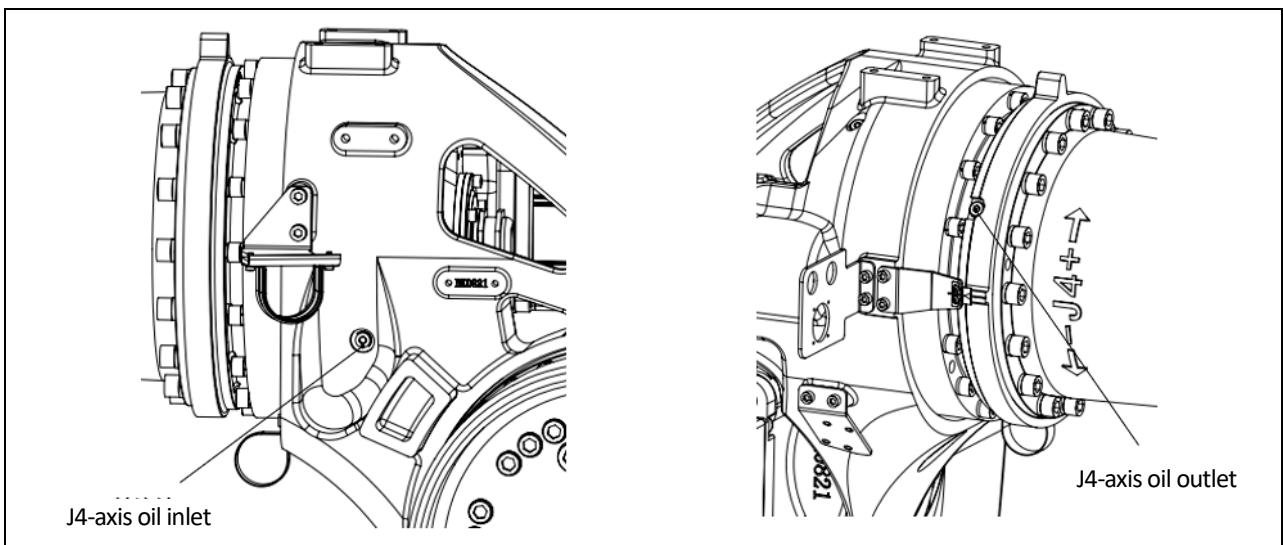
J4-axis oil inlet/outlet(ER270-2700)
